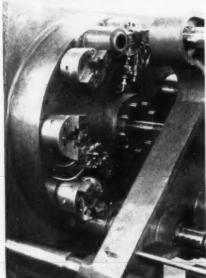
Hydraulically operated two jaw chucks on special indexing machine. Note the hydraulic valving near the chucks.
